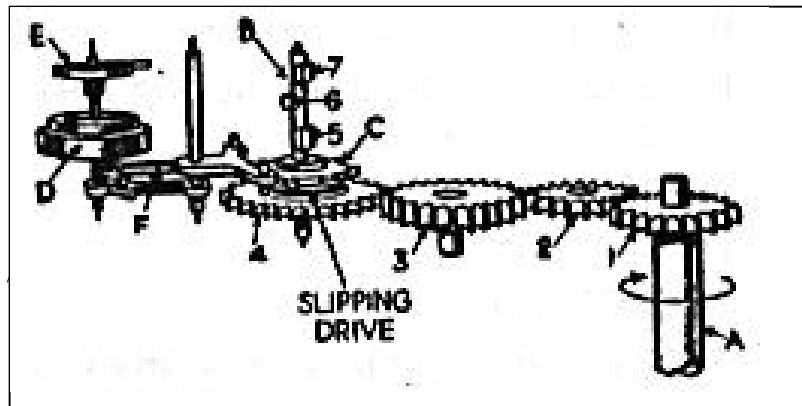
Showing Gear-wheels and Camshaft of Smiths Chronometric Speedometer.
